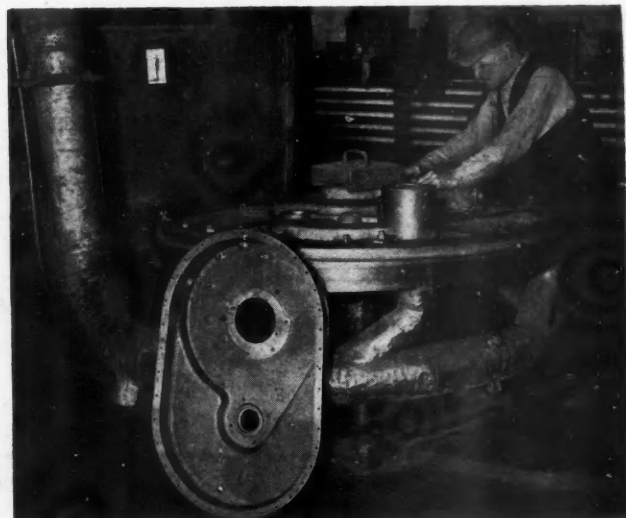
End crankcase covers of a tractor are shown above being ground on horizontal grinders
